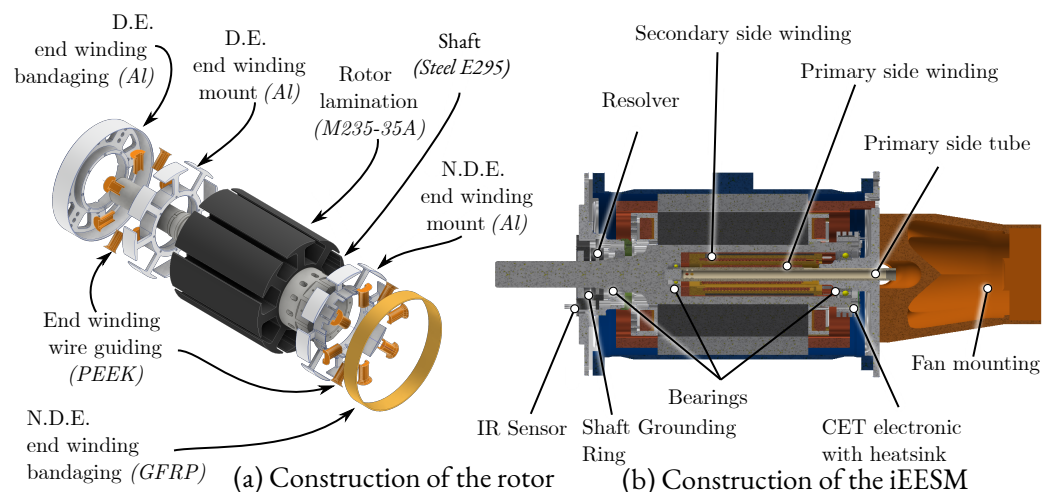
Mechanical design of the rotor (a) and the complete iEESM (b) in a cross-sectional view.
